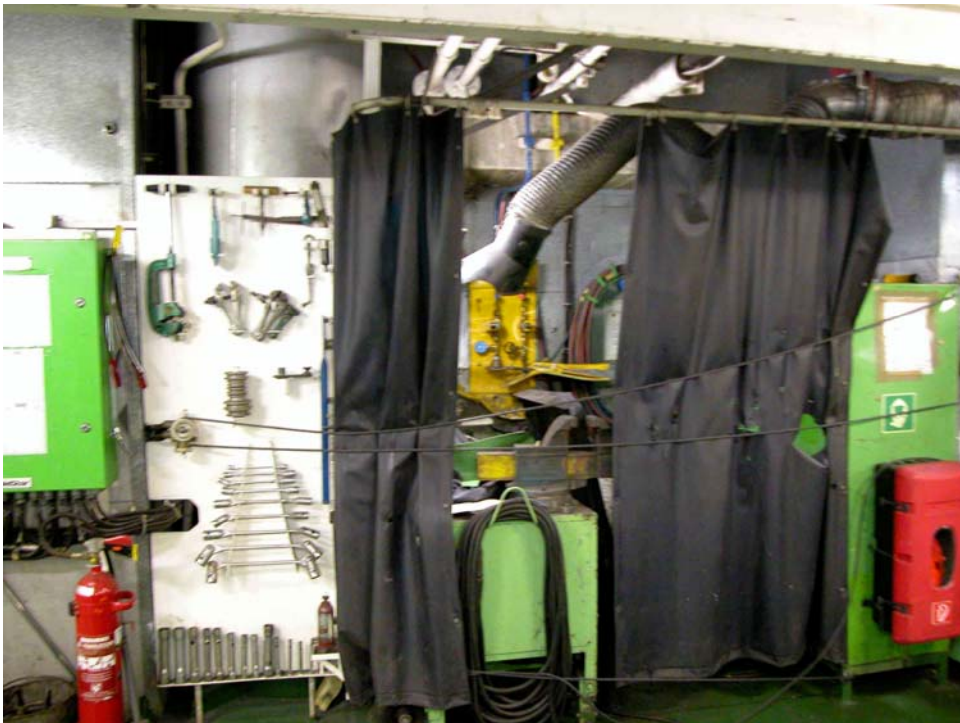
Welding workplace separated by curtain (view 2)
